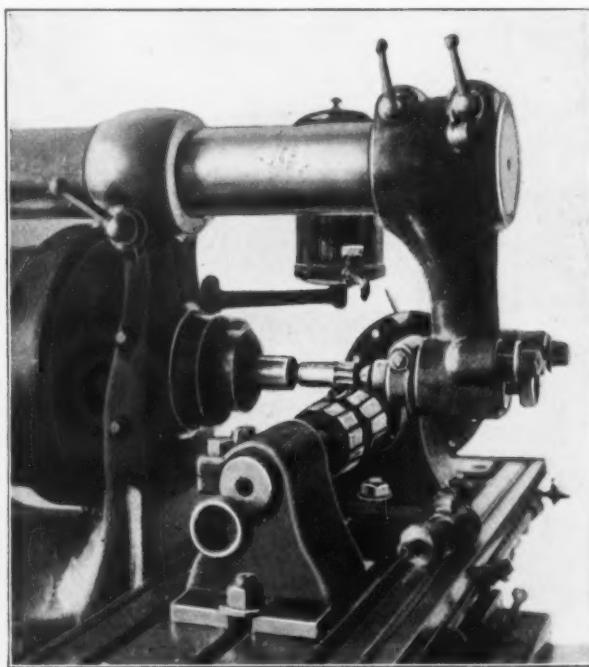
Milling the Cam Surfaces on a Reamer Cam Bolt.
